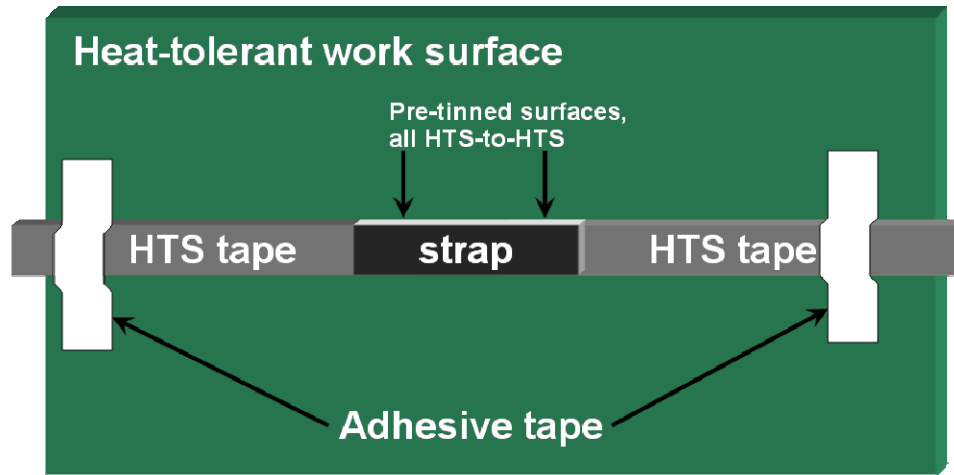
Method of Positioning and Securing HTS Wires for Soldering of Strap Splice Overlap Joints
